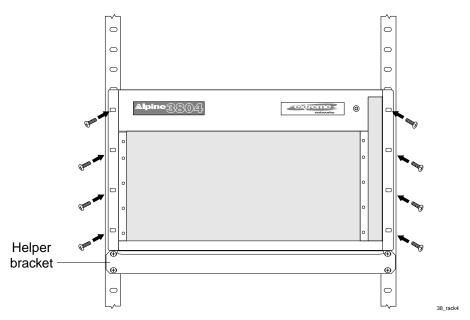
The Alpine 3804 chassis requires 8 screws to be securely mounted in a rack
